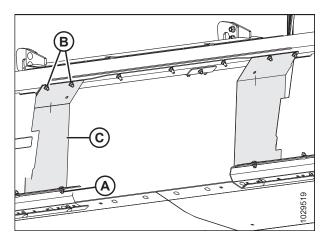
Challenger[®] and Massey Ferguson[®] Side Panels – View from Front
